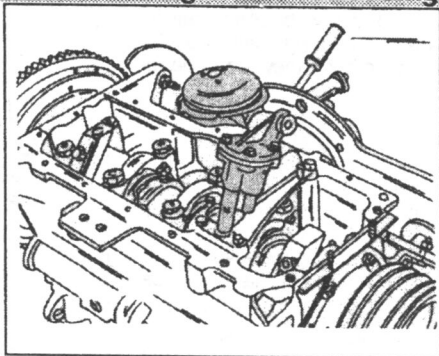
The oil pump is fitted to the bottom of the crankcase.
